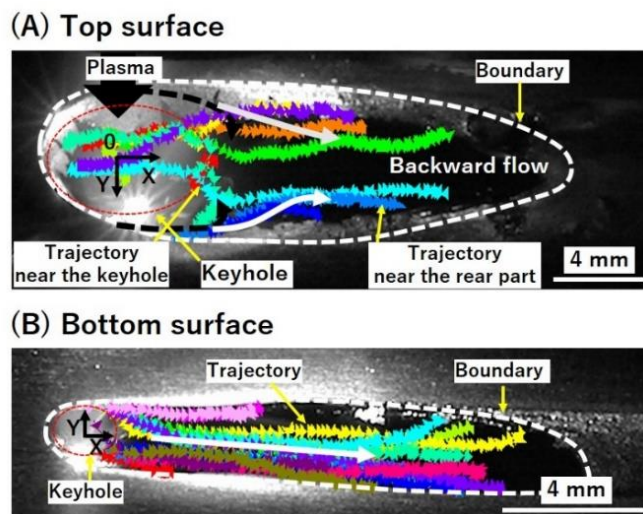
Convective patterns on the weld pool surfaces: (A) Top surface; (B) Bottom surface [35]
